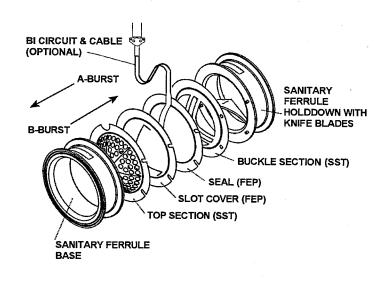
Rupture Disc Assembly (Sanitary Holder Type Shown)
